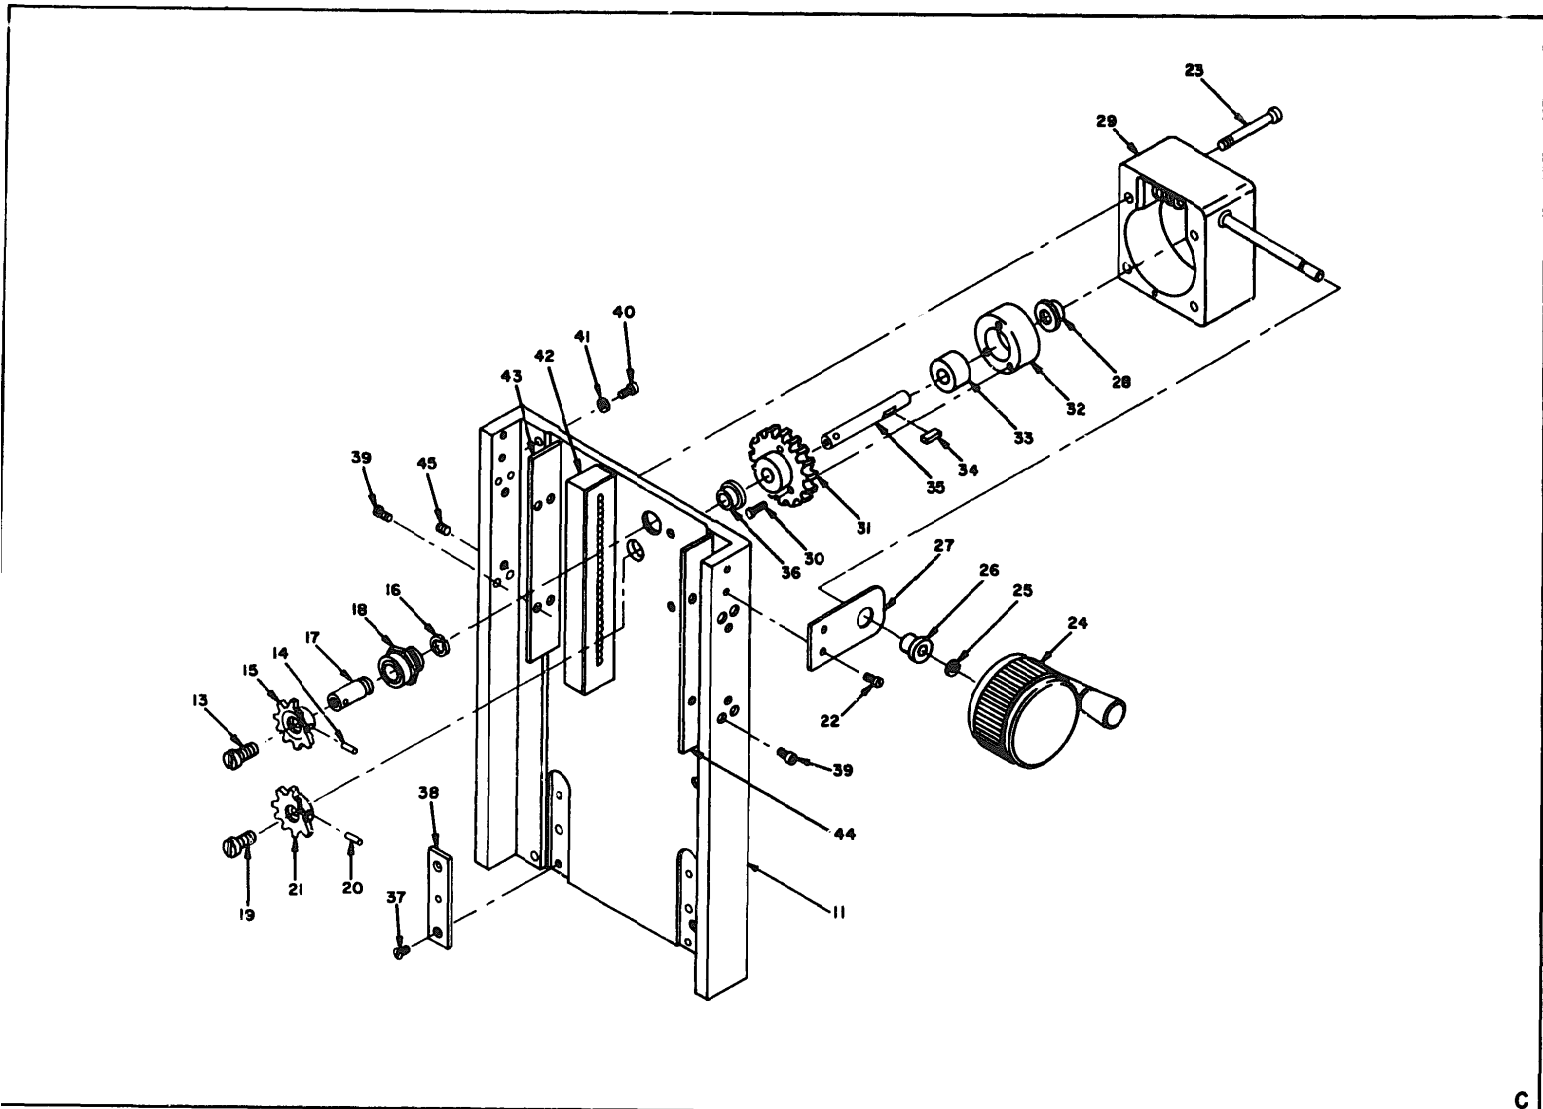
Disassembly of Z-travel carriage, exploded view (part 2 of 3).
